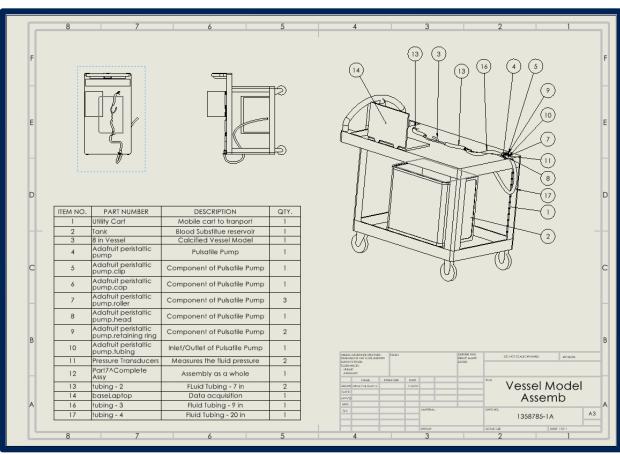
Drawing of Assembly [PN: 1358785-1A _ Vessel Model Assy.]
